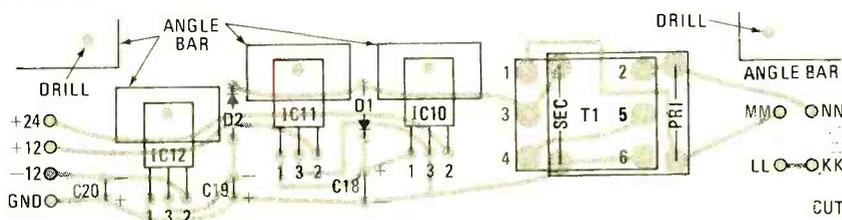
MOUNTING BRACKETS and heat sinks for three regulator IC's are made from pieces of aluminum angle. These and other power supply components are placed on board as shown.
